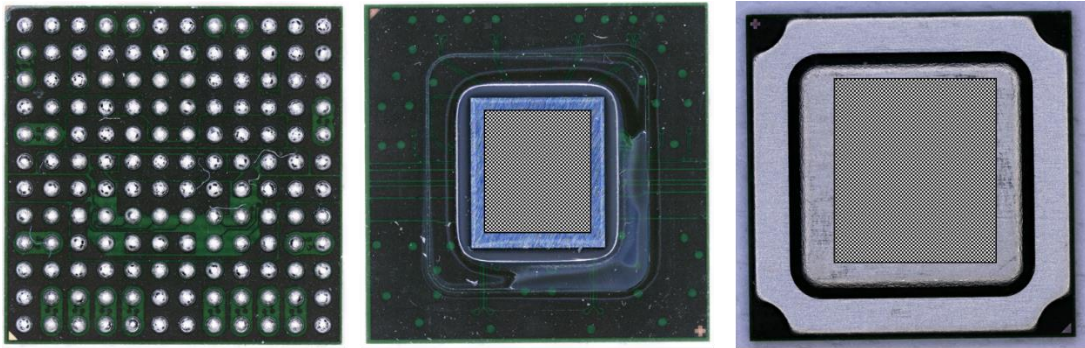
(a) Bottom view of the flip chip BGA package (b) Top view of the package without lid (c) Top view of the package with lid
